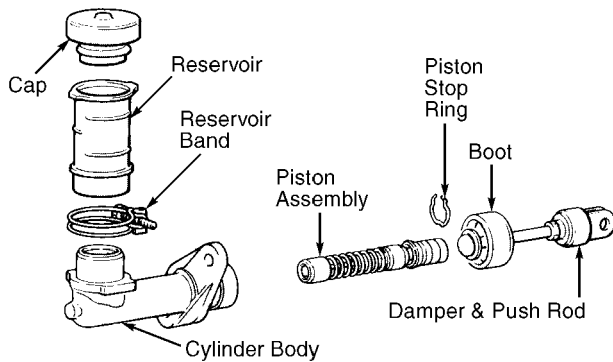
Exploded View Of Clutch Master Cylinder (Typical)
